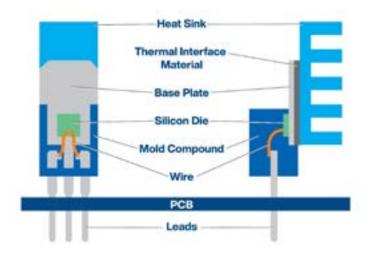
View of a typical through-hole package with a heat sink. (Source: Mouser Electronics)
